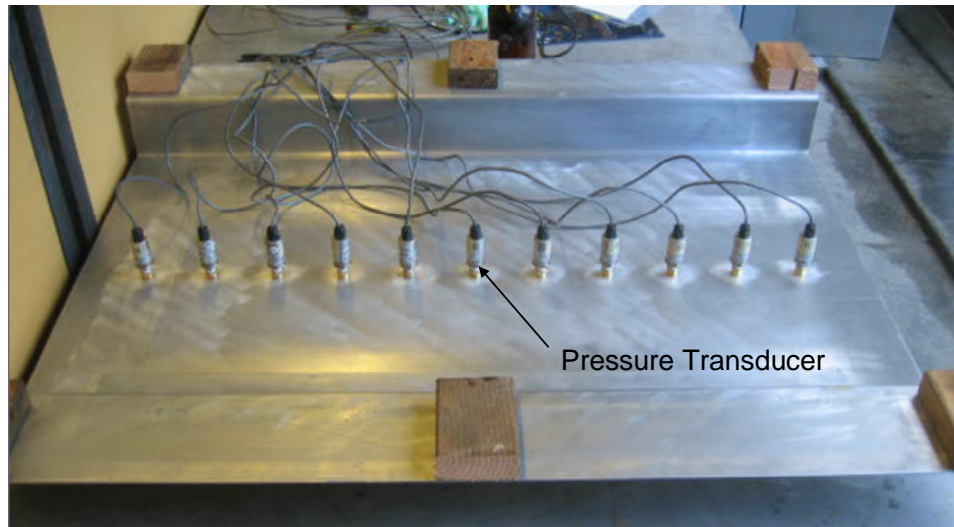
Photograph showing the pressure transducers on bottom side of mold.
